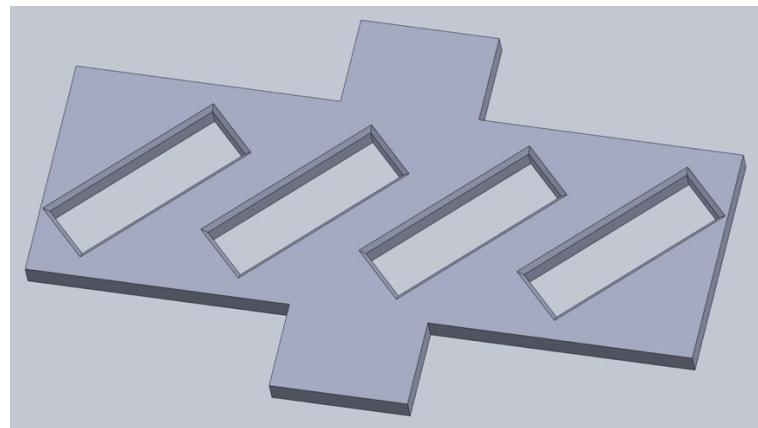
3D drawing of stabilizing piece for holding the potentiometers [45]
